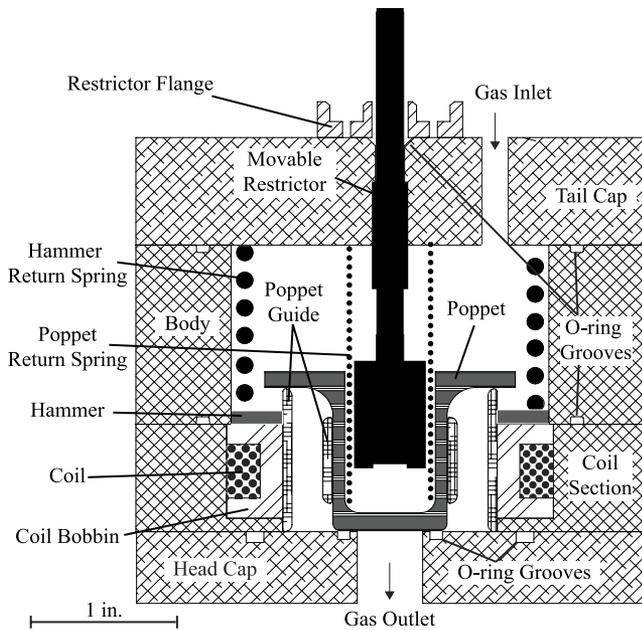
A cross section view of the valve assembly in the closed position, with all principal elements labeled.
